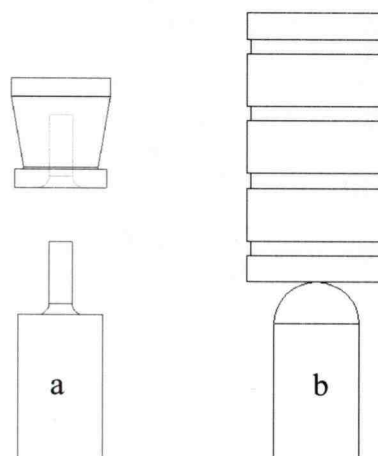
2-D image showing (a) design I and (b) design II of plunger and cylinder rod.
